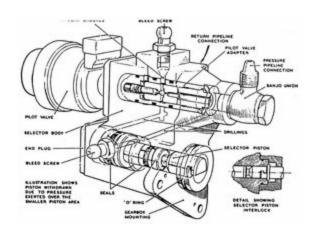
Mk 20 hose-drum unit hydraulic gear-change valve
